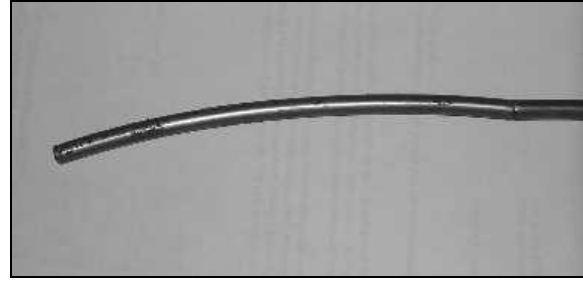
Damaged portion of the capillary tubing showing the pits cracks and corrosion products concentrated on the curved side.
